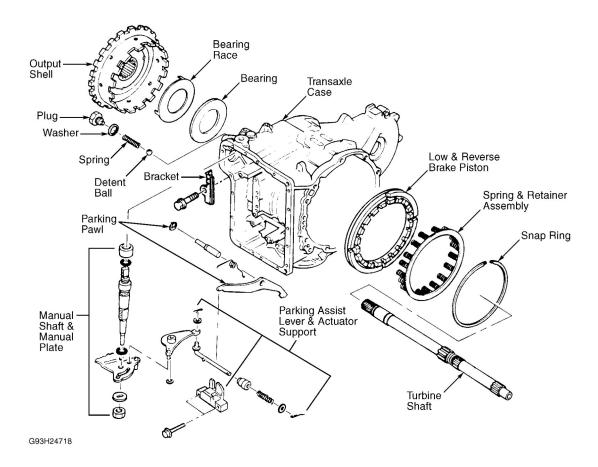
Low & Reverse Brake Piston & Related Components (GF4A-EL Shown; FA4A-EL Similar)
